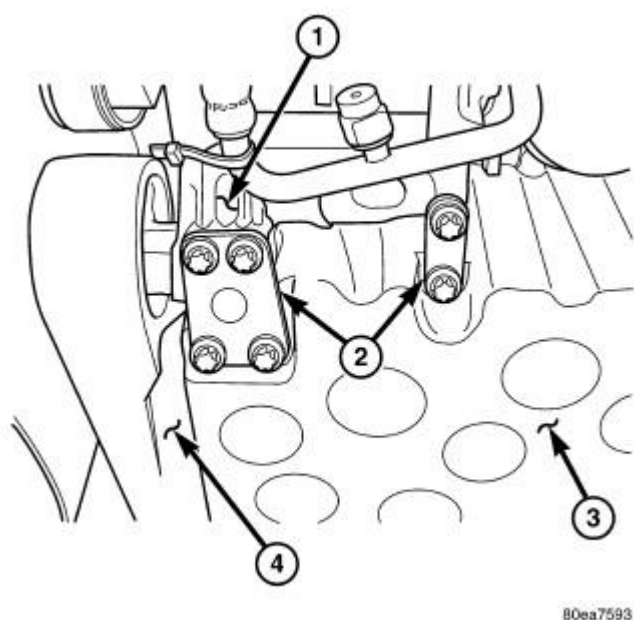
A/C Compressor Mount to Oil Pan Brackets
